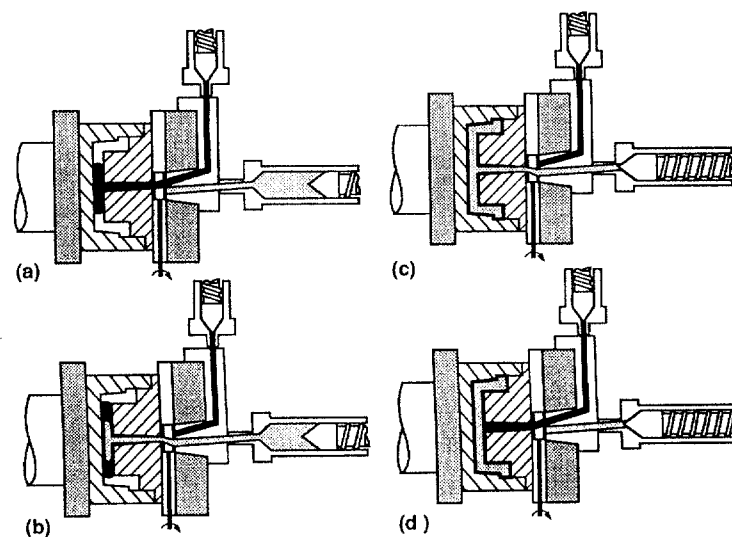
Stages of a sequential co-injection molding process. (a) Injection of skin material, (b) injection of core material, (c) near end of fill, and (d) final injection of skin material to purge the core material from the sprue [39].
